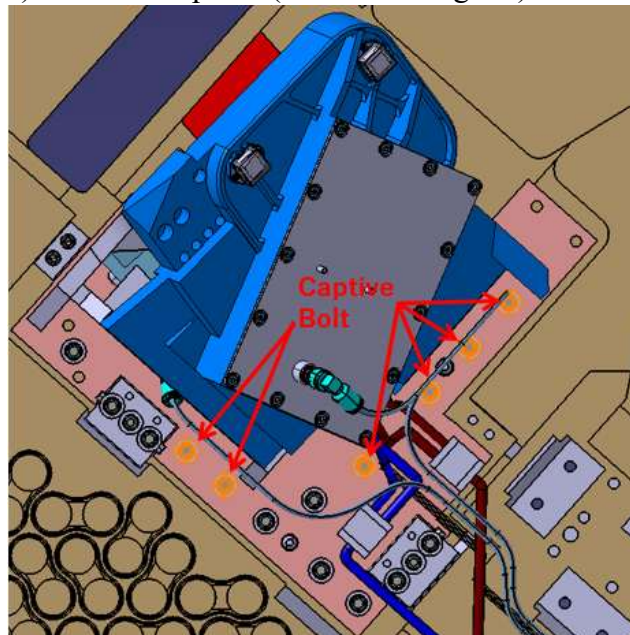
Outlines of screw tight the captive bolt on the base plate.
